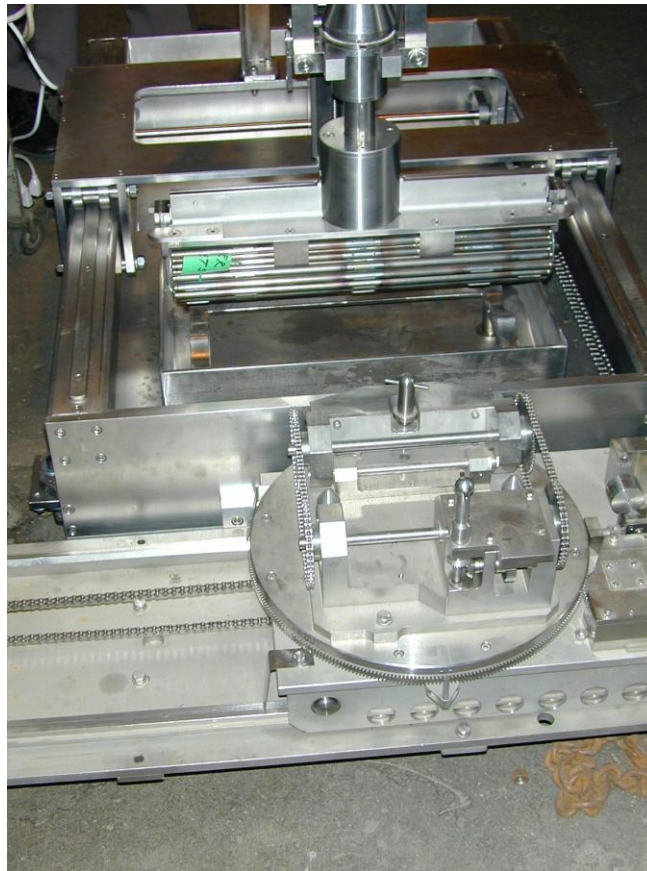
The Mini Gantry Attachment to the Fuel Inspection Platform
